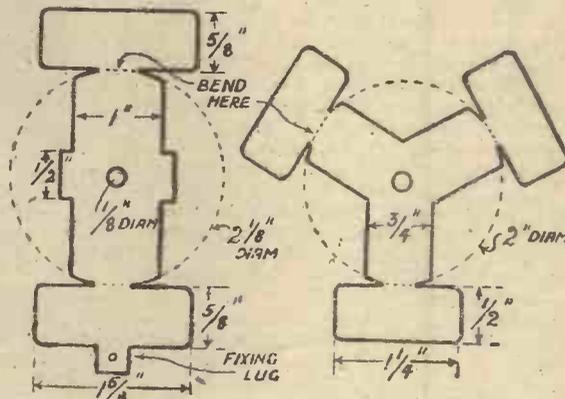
The pole-pieces and armature cut out and ready for bending.
